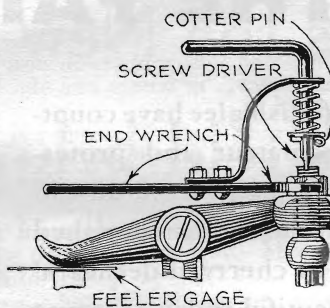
Timesaving tool for adjusting overhead valves fitted with slotted bolt and lock nut.
